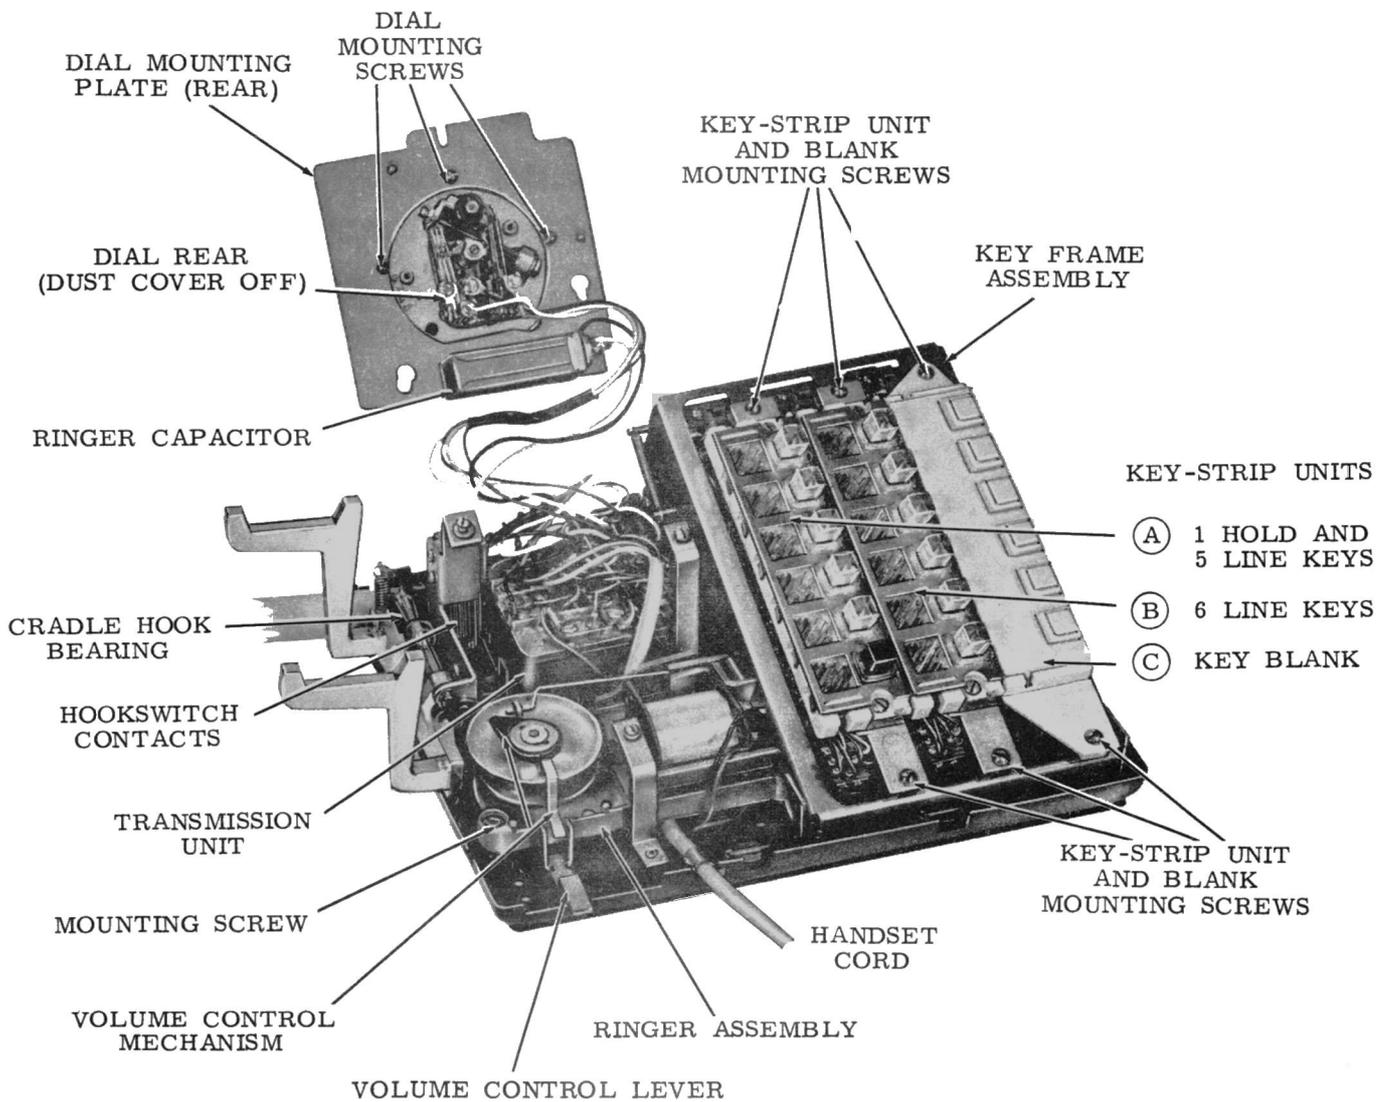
Type 860A with housing removed, and dial assembly raised and inverted.
